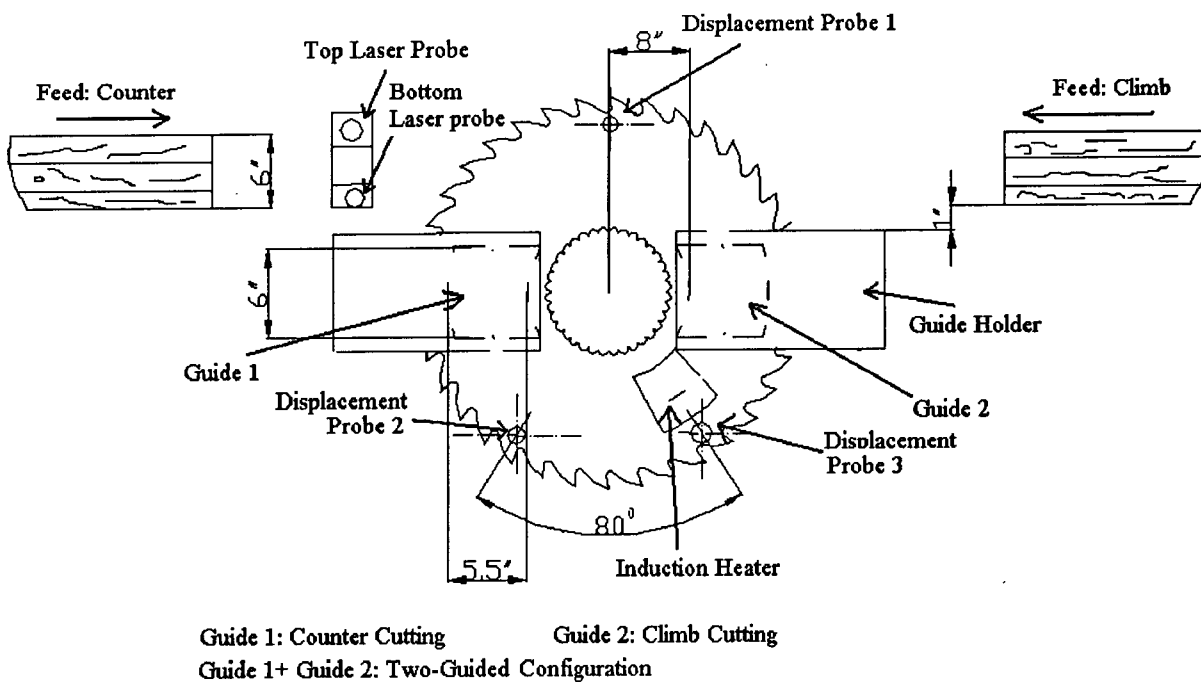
Guide and Workpiece Positions for Different Sawing Configuration
